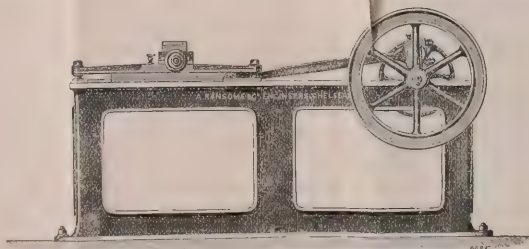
MATCH MACHINE. A. Ransome & Co., Engineers, London.
